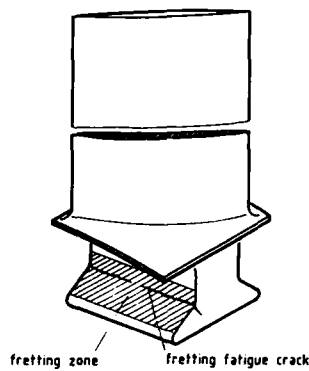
Dovetail of a compressor blade with fretting fatigue damage
